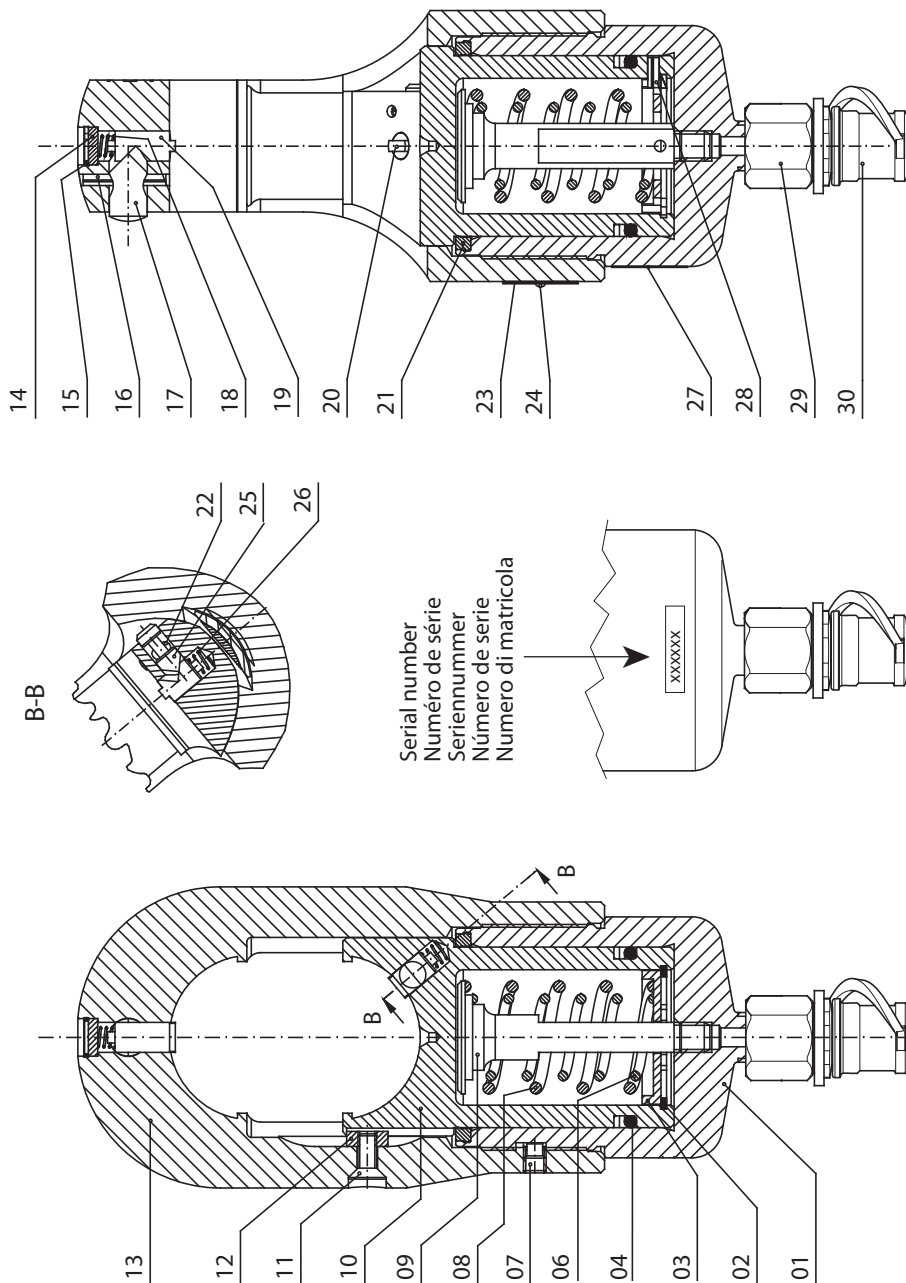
LONGITUDINAL SECTION - COUPE LONGITUDINALE - SCHNITTZEICHNUNG - SECCION LONGITUDINAL - SEZIONE LONGITUDINALE
